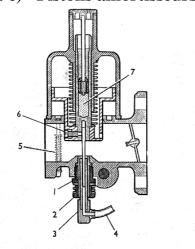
SECTION VIEW OF THE HS4 CARBURETTER.
